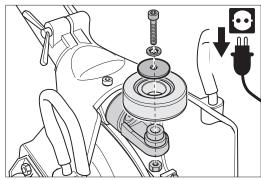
Tilt the machine forwards over the bracket. Remove the screw with the washers and nut in the centre of the wheel and take off the back wheel. Assemble in reverse sequence. Ensure that the machine is standing securely!
